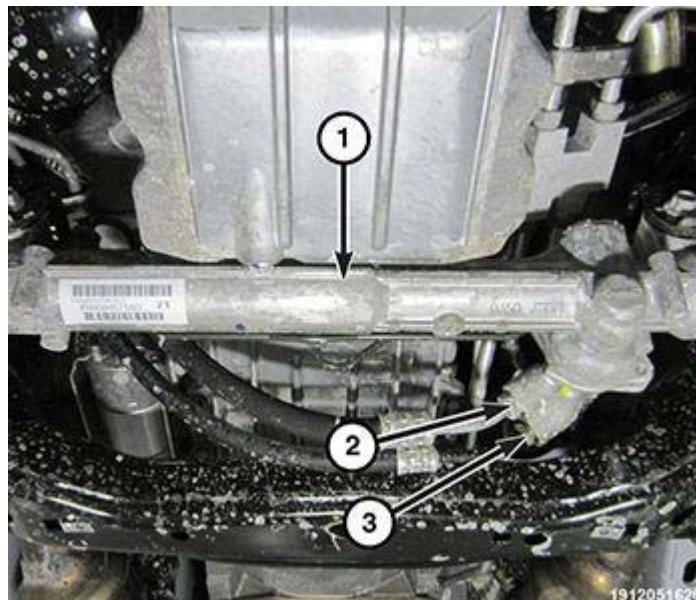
Steering Gear, Pressure Hose & Return Hose
